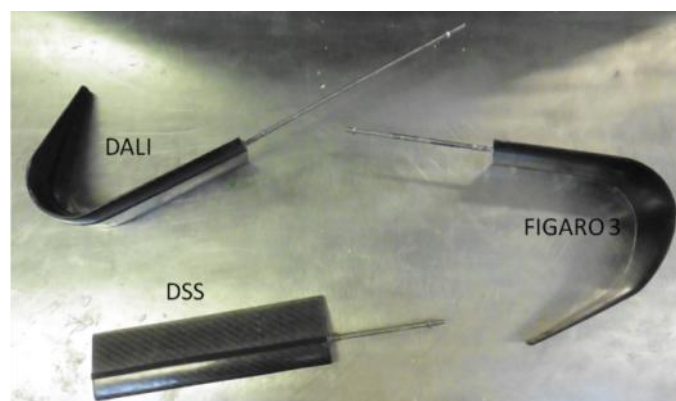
Hydrofoils with threaded rod, after vacuum bagging and finish coating. Own picture.
